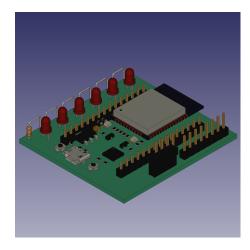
Render of the PCB in FreeCAD. PCB of the ESP32 module is not visible.
